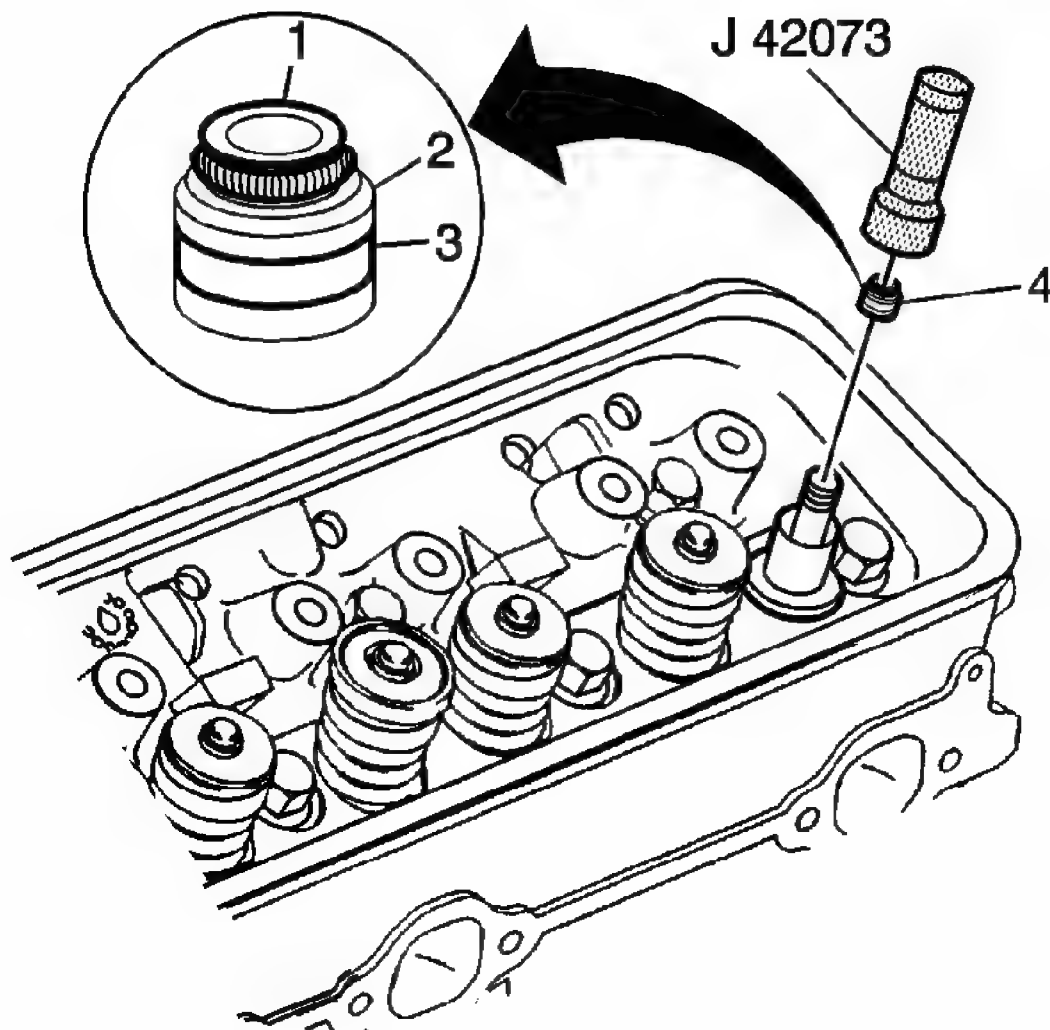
Locating Exhaust Valve Oil Stem Seal Components
